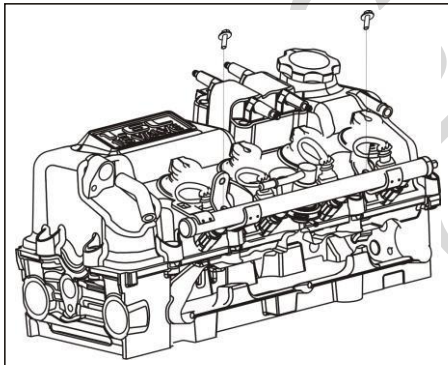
Removal of Tritec 1.6L Engine Fuel Rail Fixing Bolt
